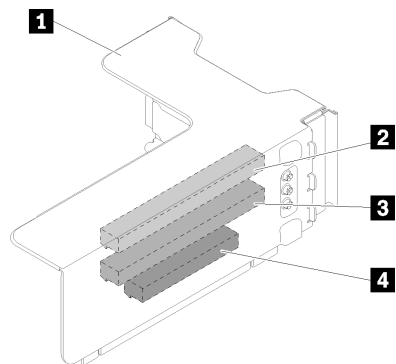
x8/x8/x8ML2 PCIe FH Riser Assembly
